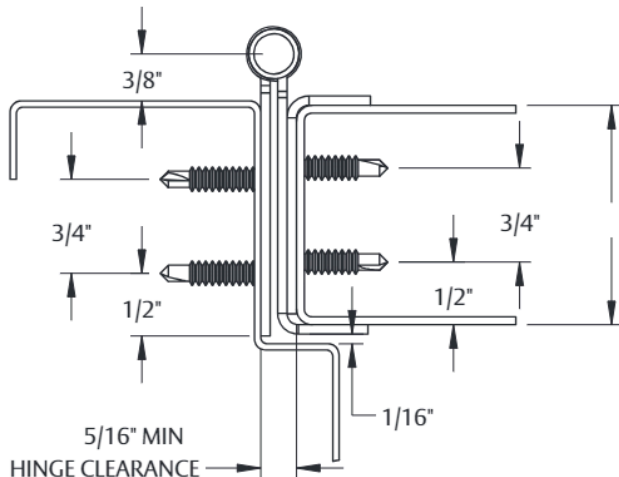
HINGE PLACEMENT & CLEARANCE TEMPLATE
